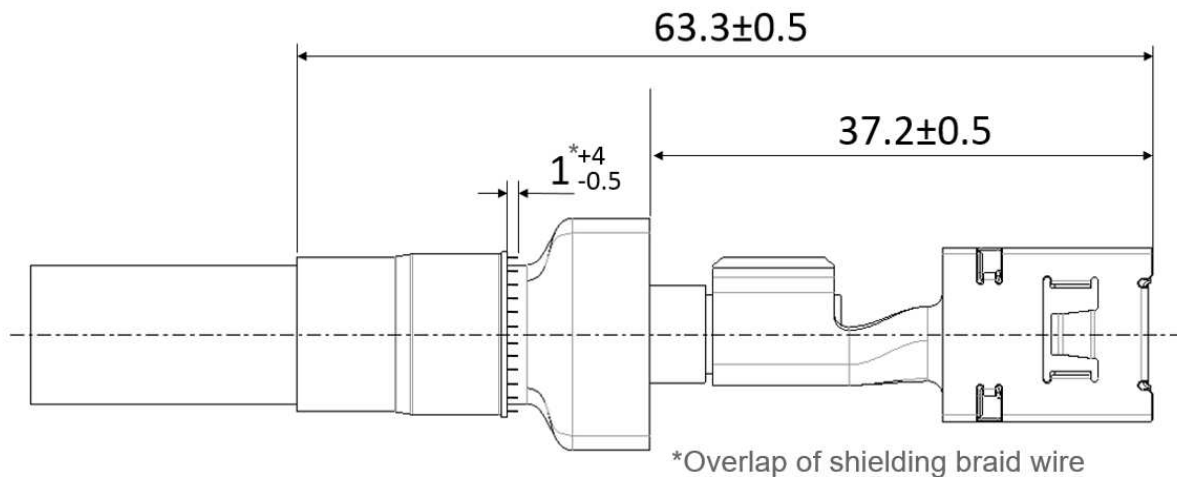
Inspection dimensions (all dimension in crimped state)
